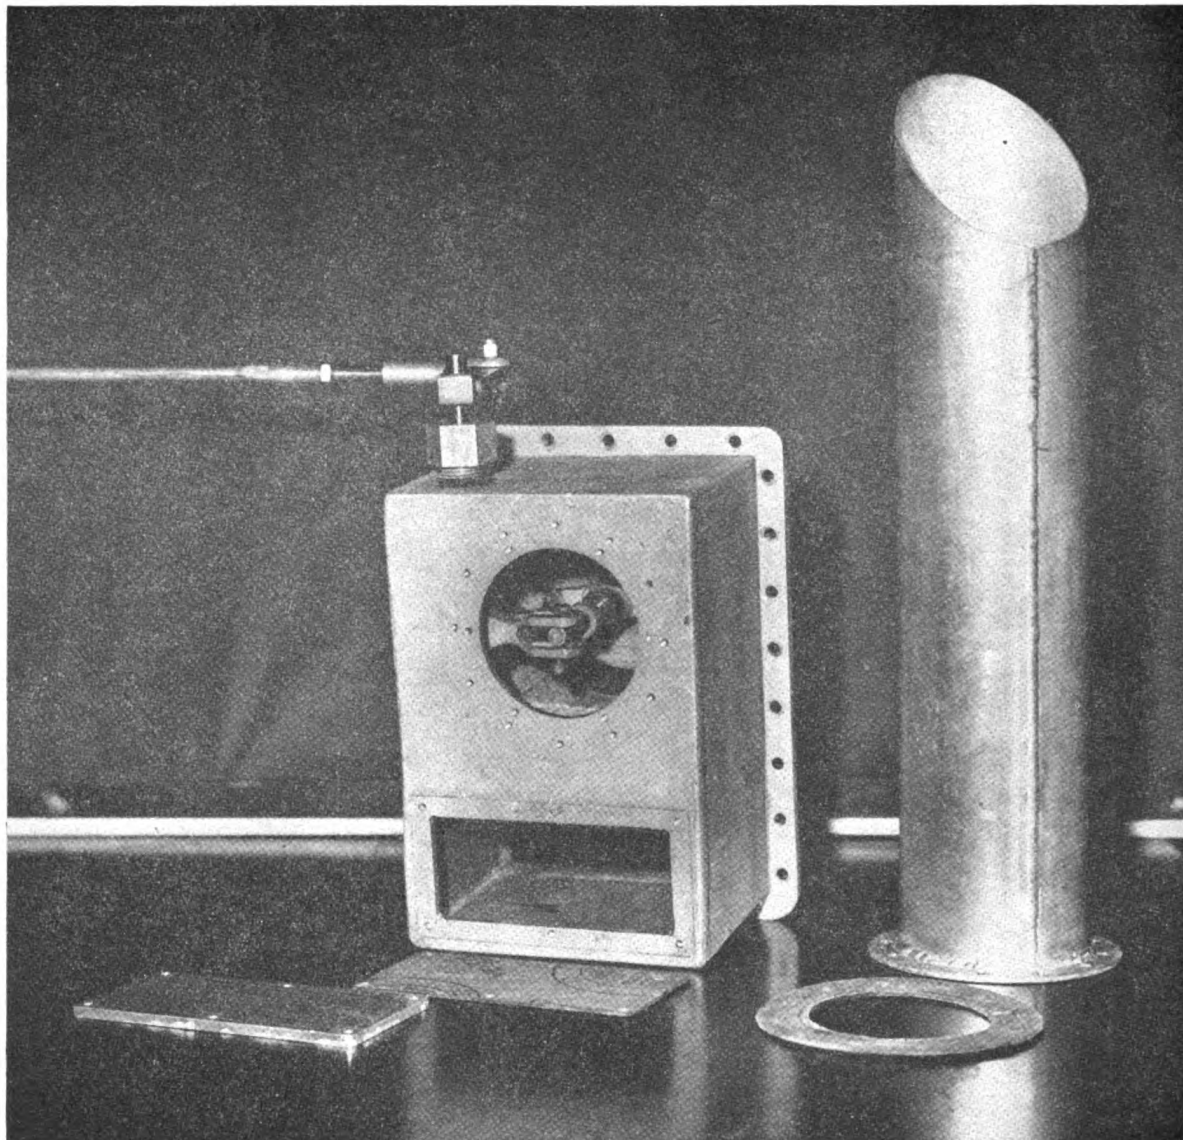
Valve-sump assembly—DDT sprayer for B-25.
